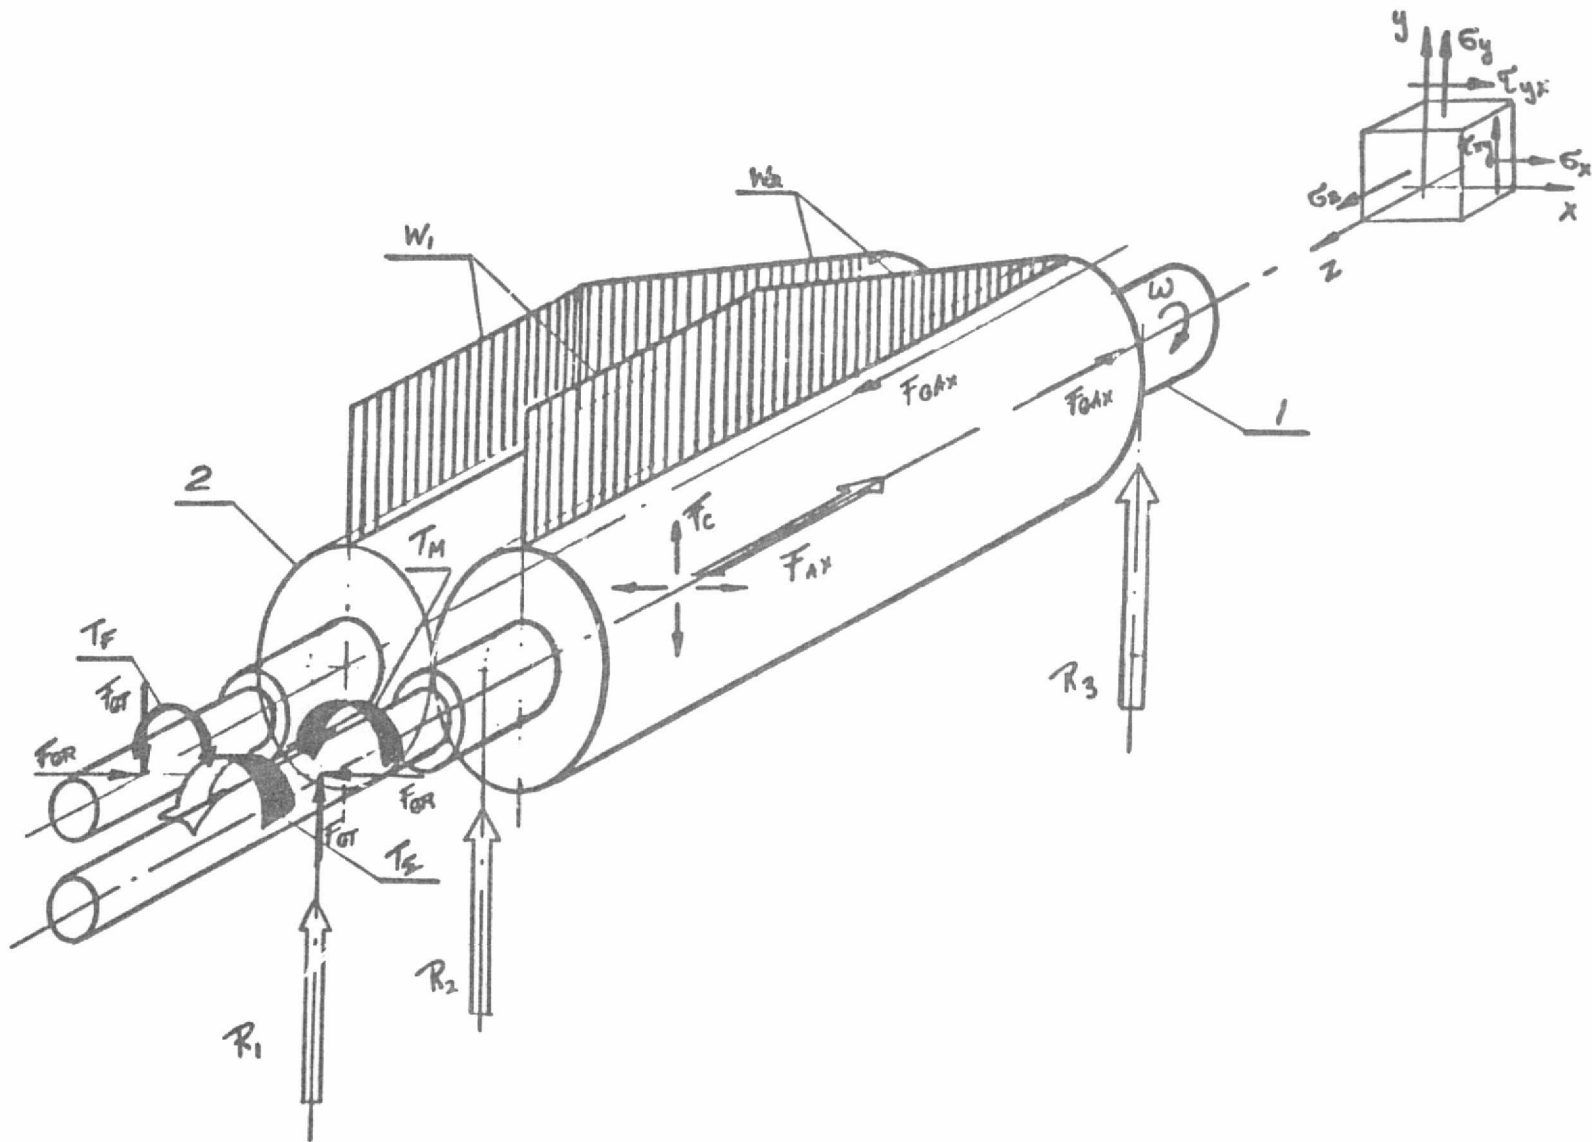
EXTERNAL LOADS ON ROTORS OF SCREW EXPANDER
